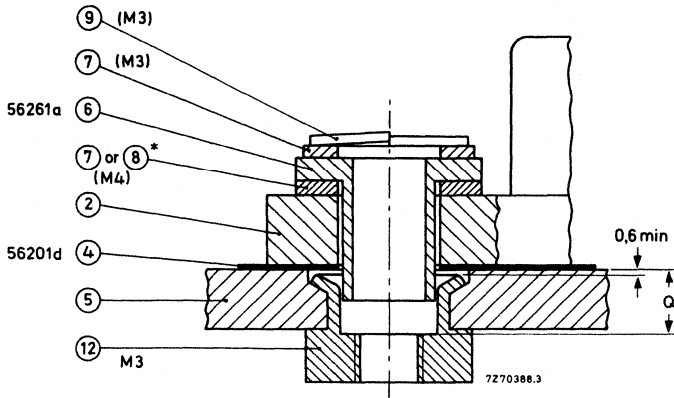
Assembly (partial) for Fig. 10 - insert nuts Q minimum 2,5 mm.
